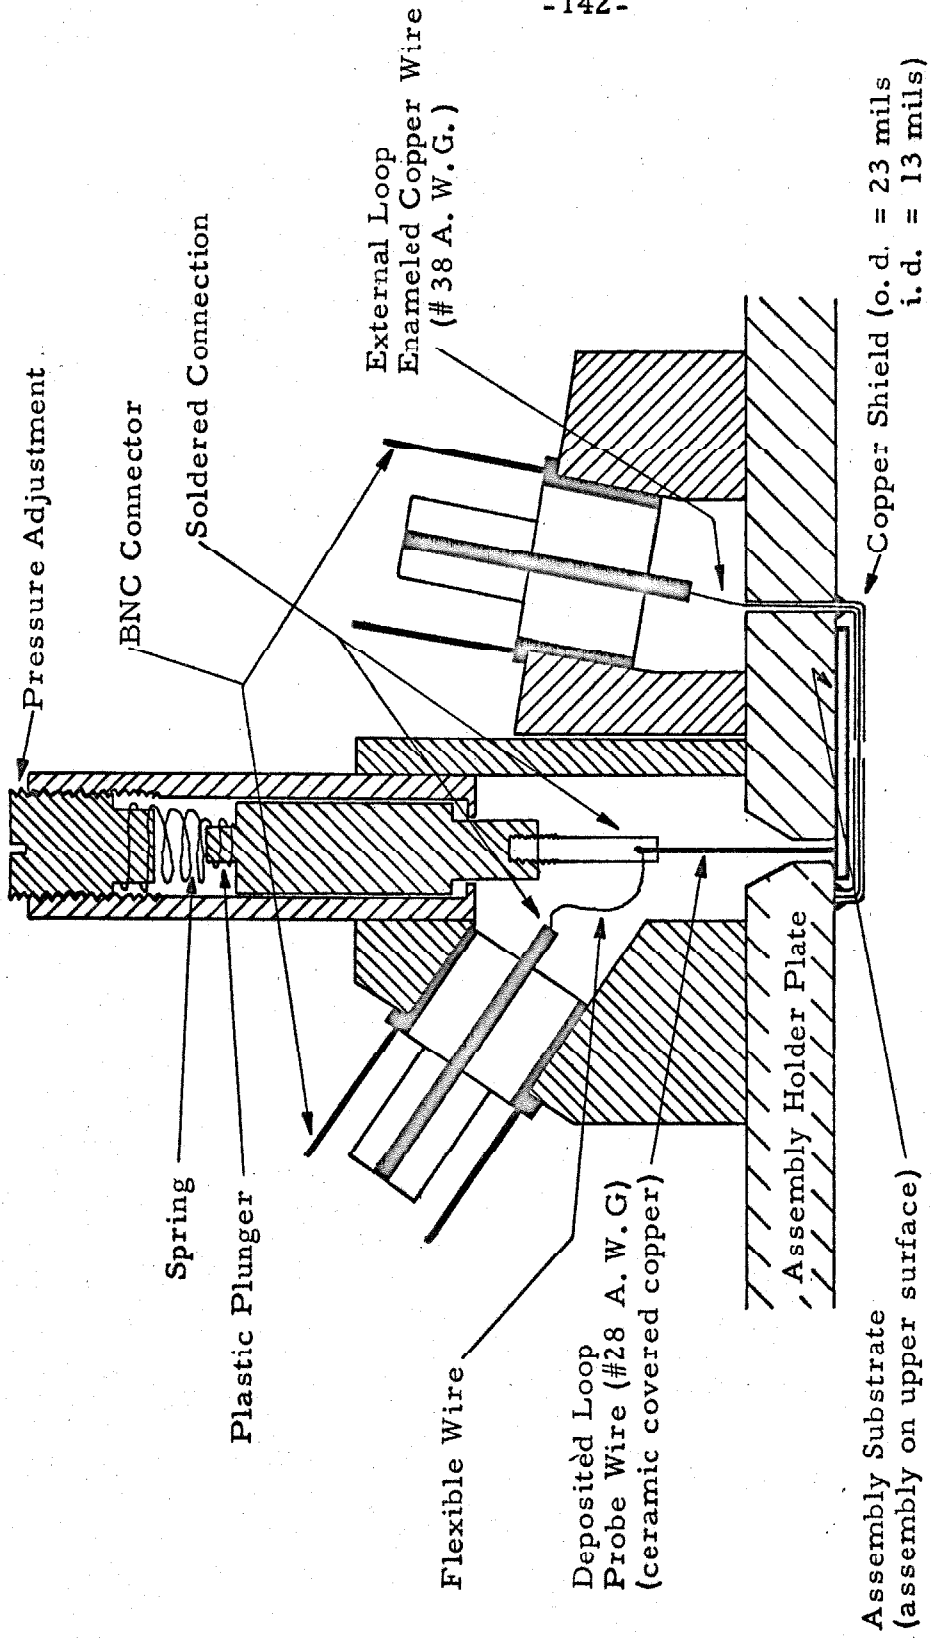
4. Assembly Holder Plate with Deposited Loop Probe and External Loop
